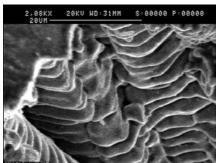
Hot crack in 314 steel after fracturing the specimen. The crack surface with parallel arranged dendrites, the free surface of a crack. SEM image
